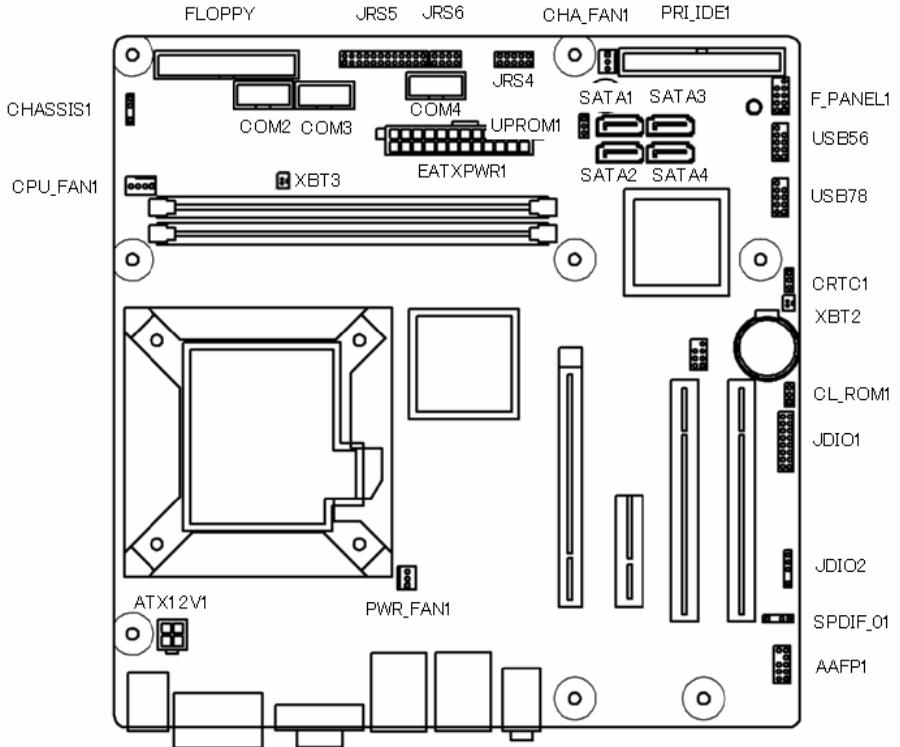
Locations and setting of jumpers and connectors inside the top cover
